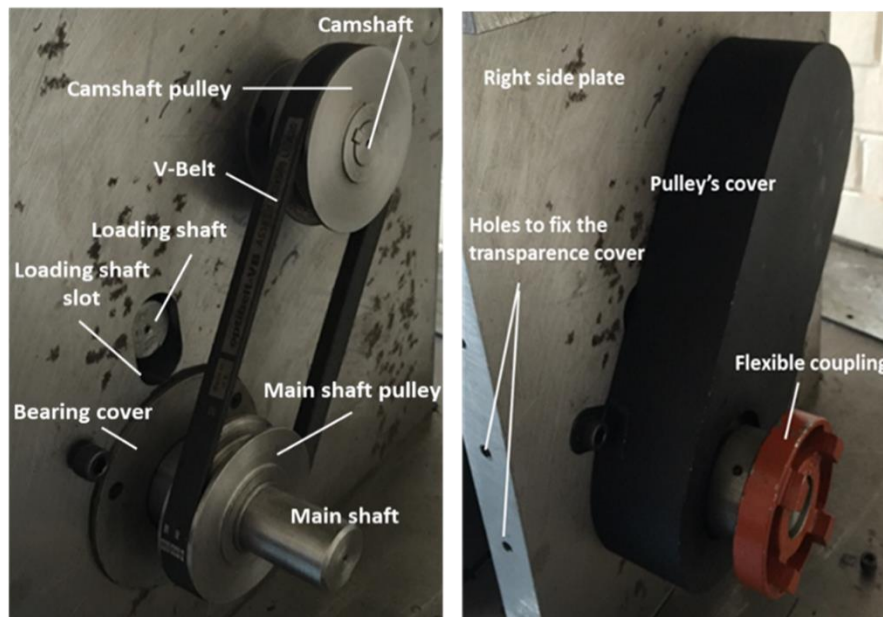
Details of the belt drive mechanism used to rotate the camshaft, without cover (left) and with cover (right).
